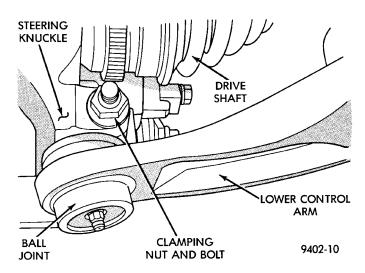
Steering Knuckle To Ball Joint Clamp Bolt from steering knuckle, so ball joint seal does not get cut.
